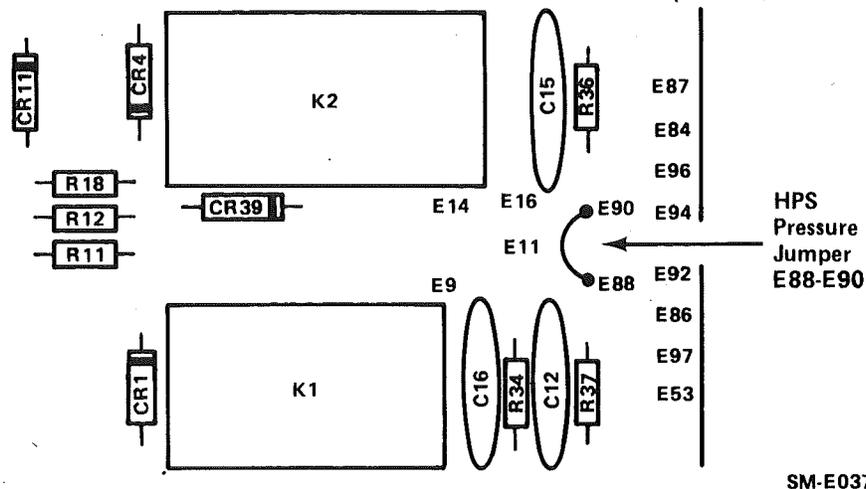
Hydraulic Power Supply Pressure Jumper
